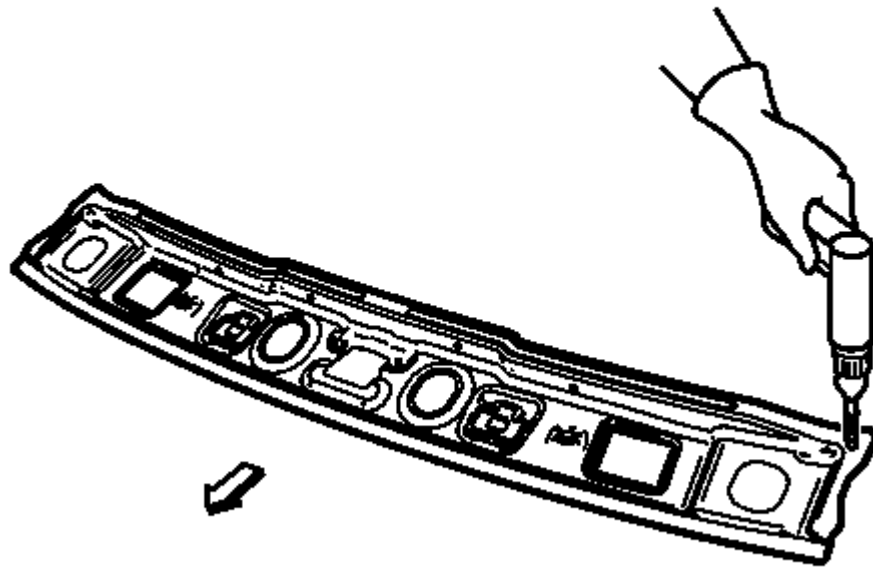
Drilling 8 mm (5/16 in) For Plug Welding Along Edges Of Service Panel
